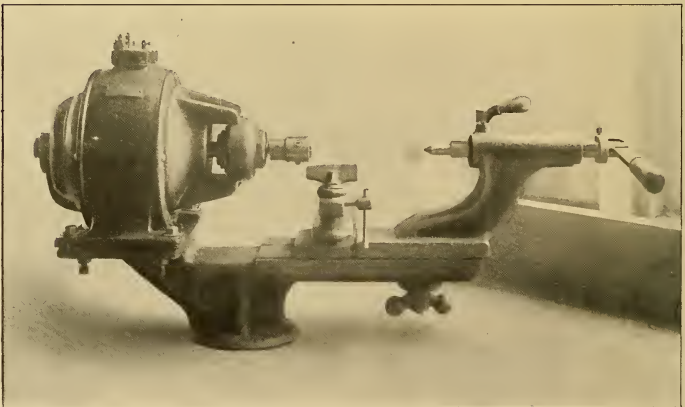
A BENCH LATHE MADE BY THE WESTERN ELECTRIC CO., CHICAGO, ILL.
